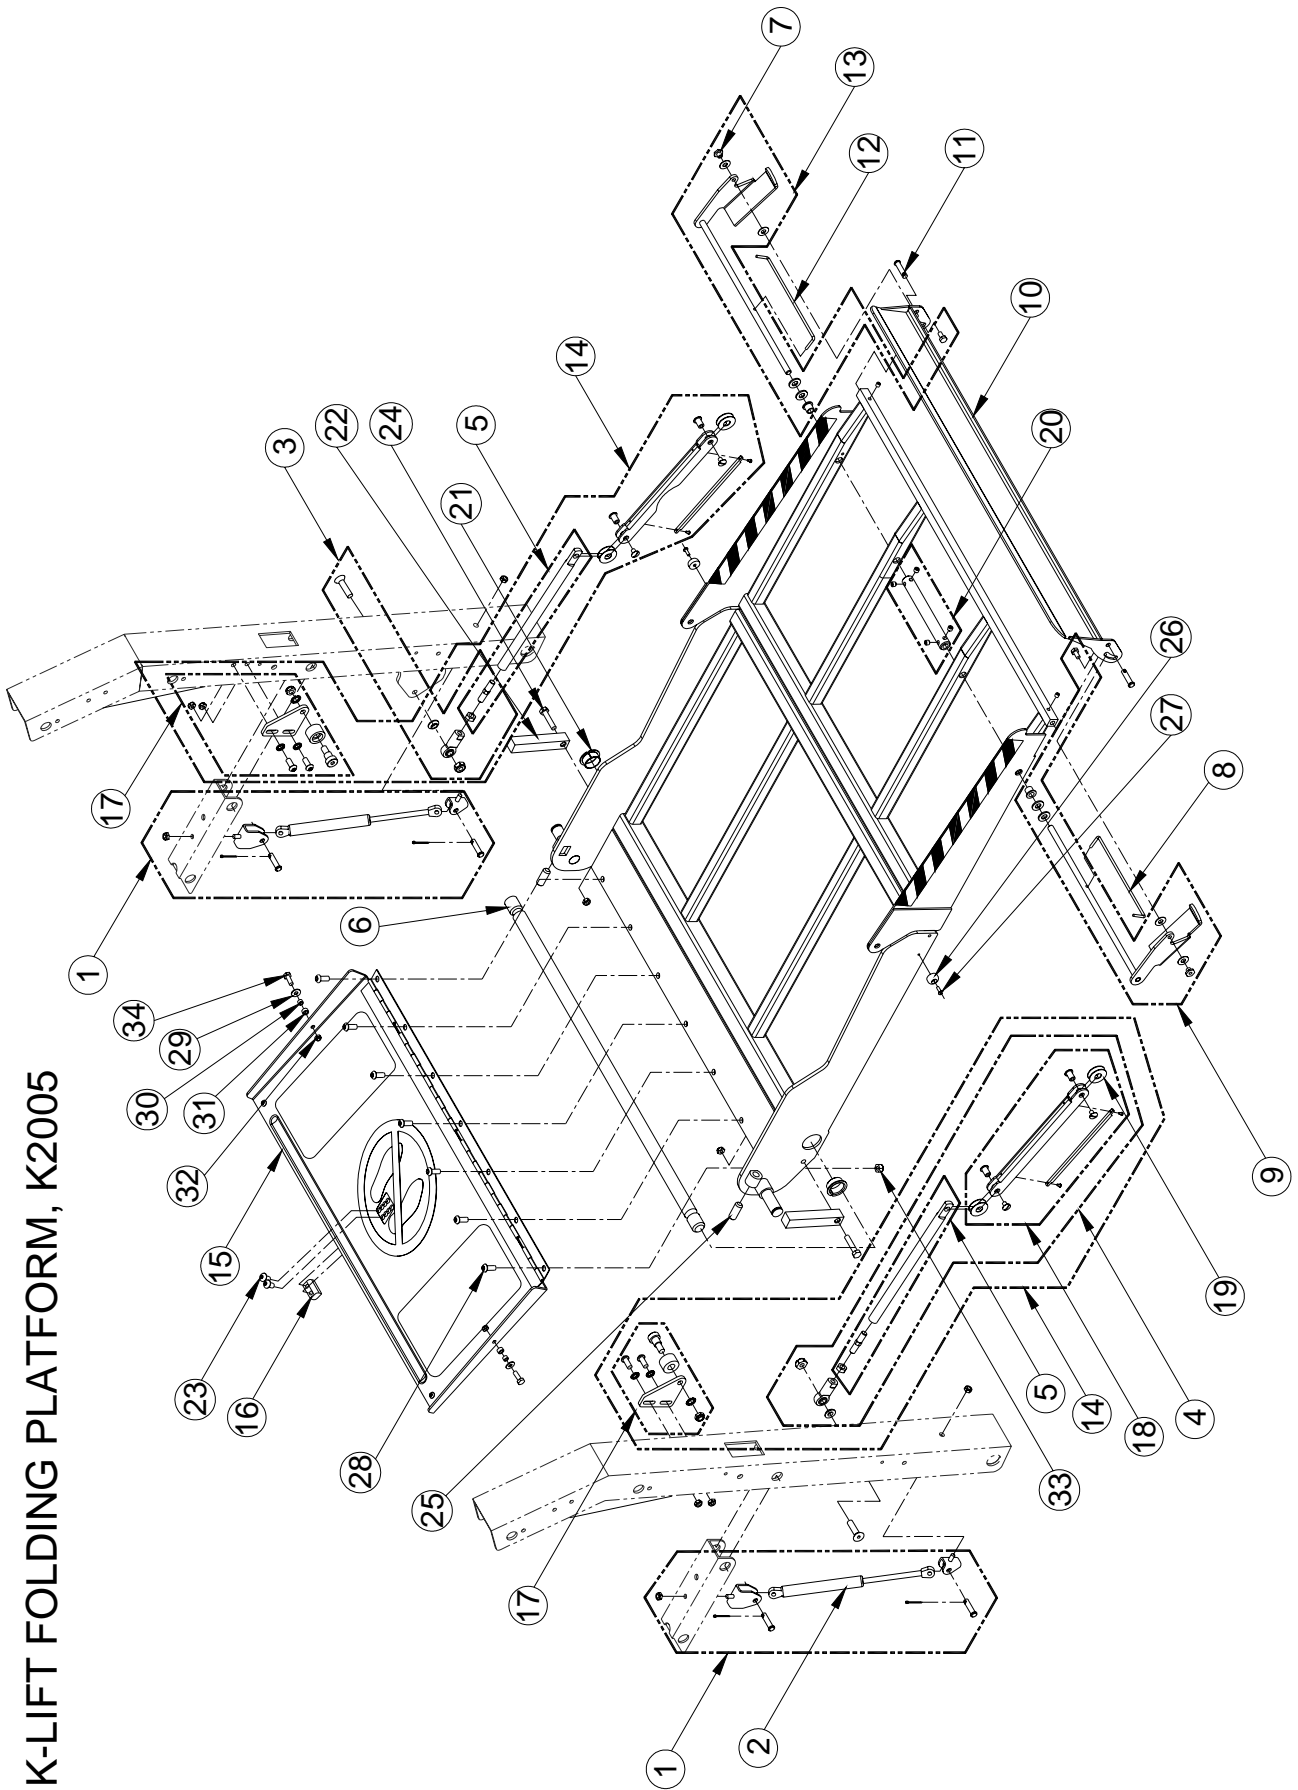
FOLDING PLATFORM ASSEMBLY, K2005
